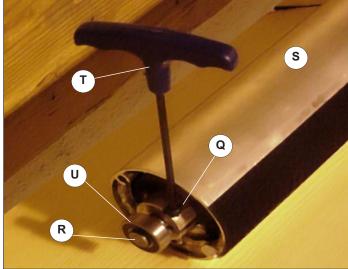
Loosen the lock collar (Q) on the non-drive shaft.
